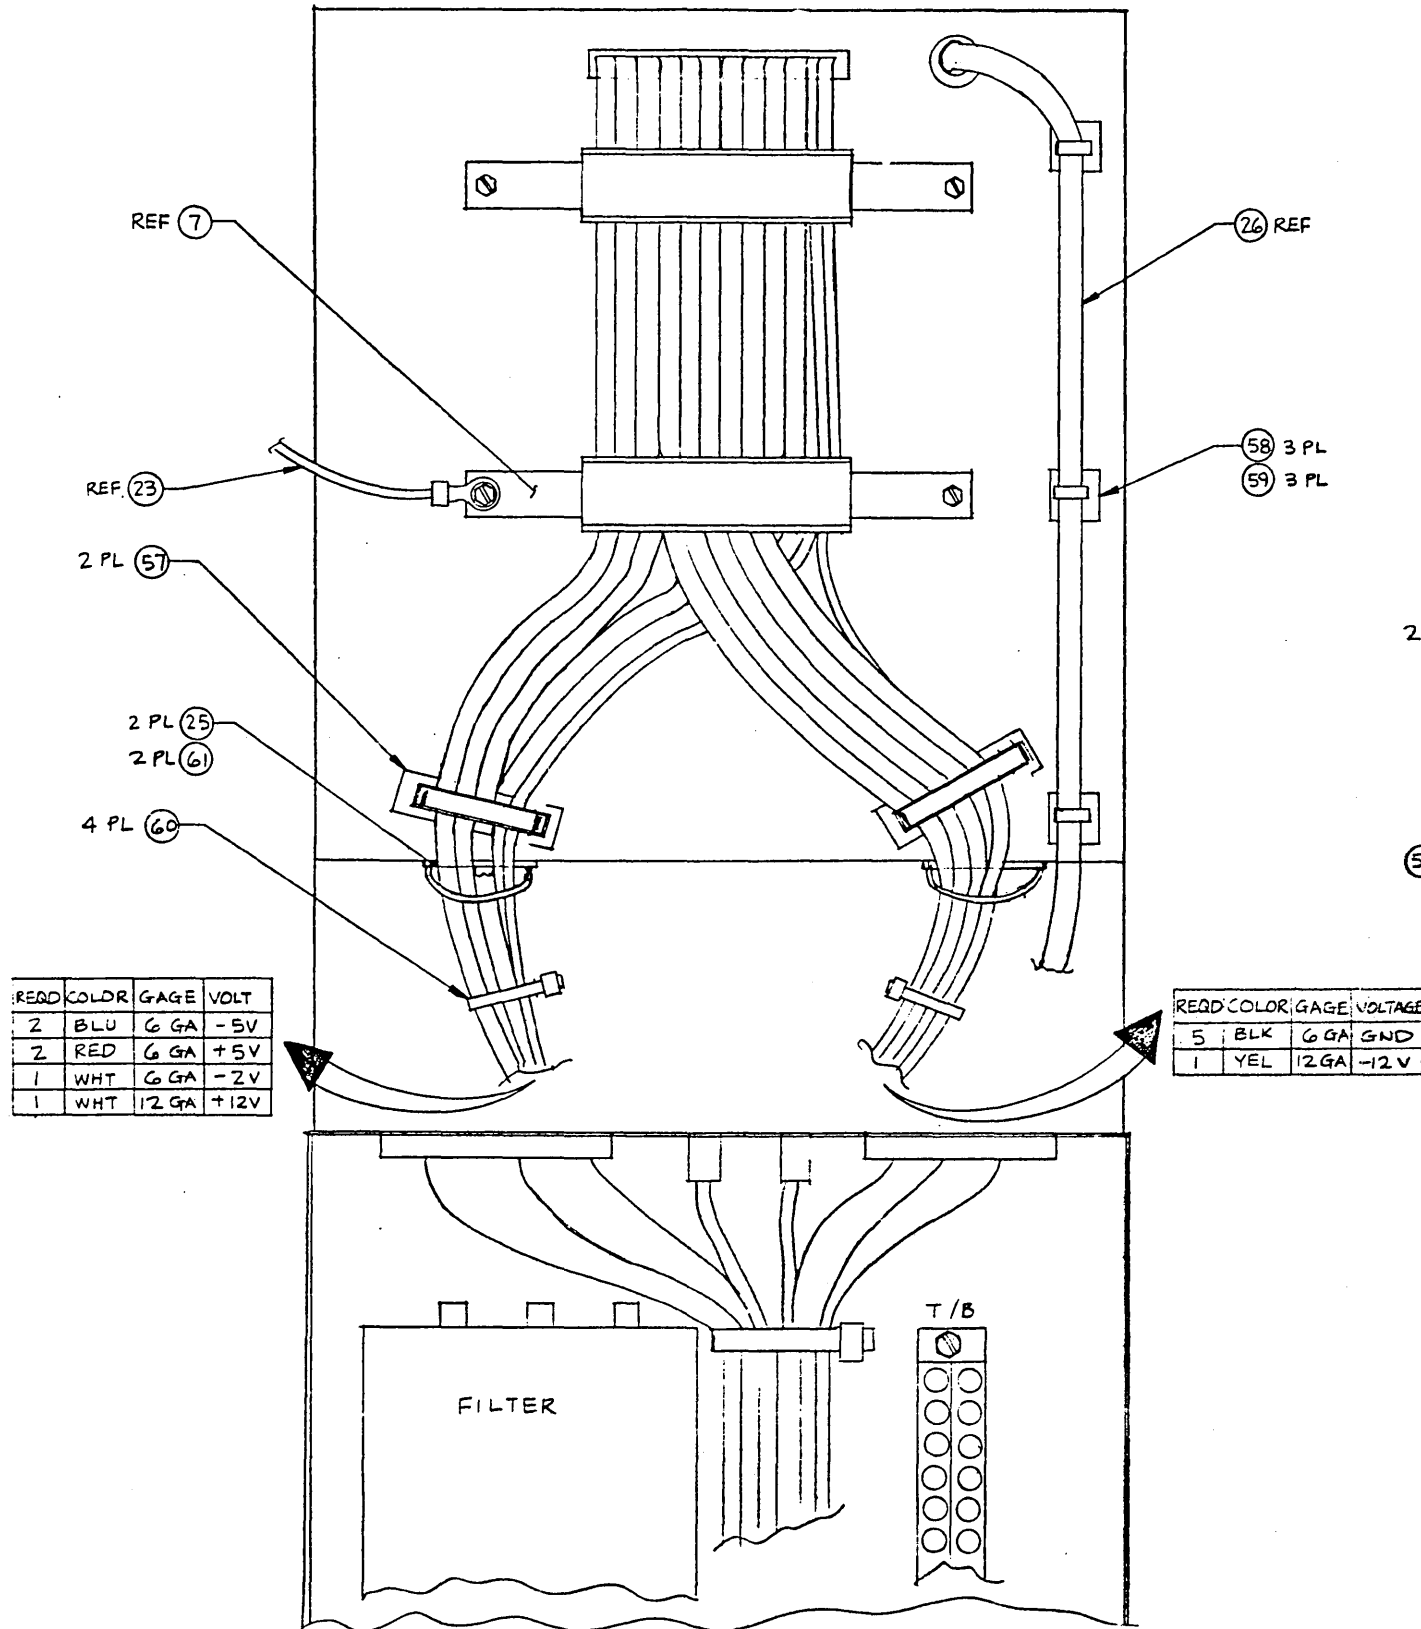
Final Assembly, Chassis, Sheet 2 of 3
